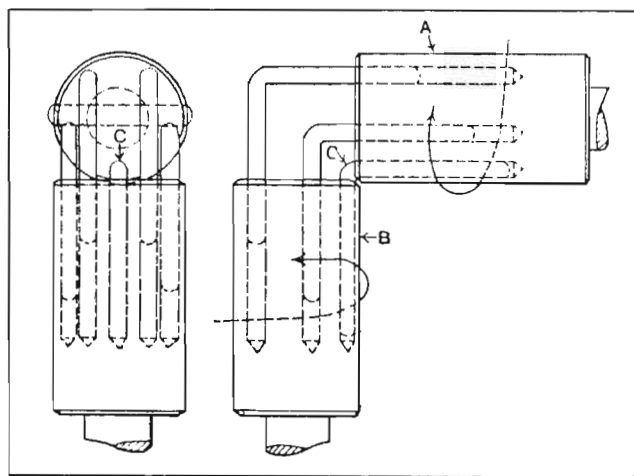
Gearless Transmission Consisting of Shafts Connected by Rods which Slide in and out as the Shafts Revolve
